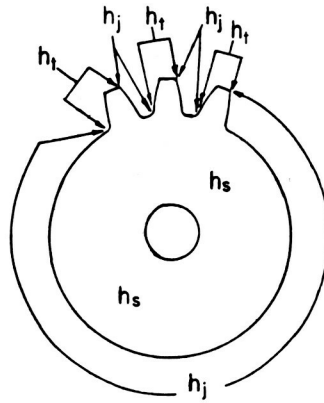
Convective heat transfer coefficients for a three-tooth model for a spiral-bevel gear or pinion.
